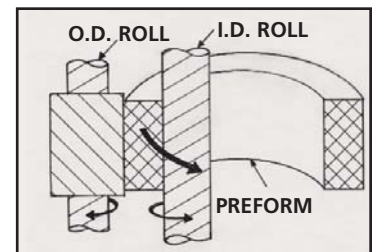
Seamless ring rolling starts with a donut shaped preform, which is squeezed between a free truing I.D. roll and a driven O.D. roll. The ring mill makes the section thinner while increasing the ring diameter.
